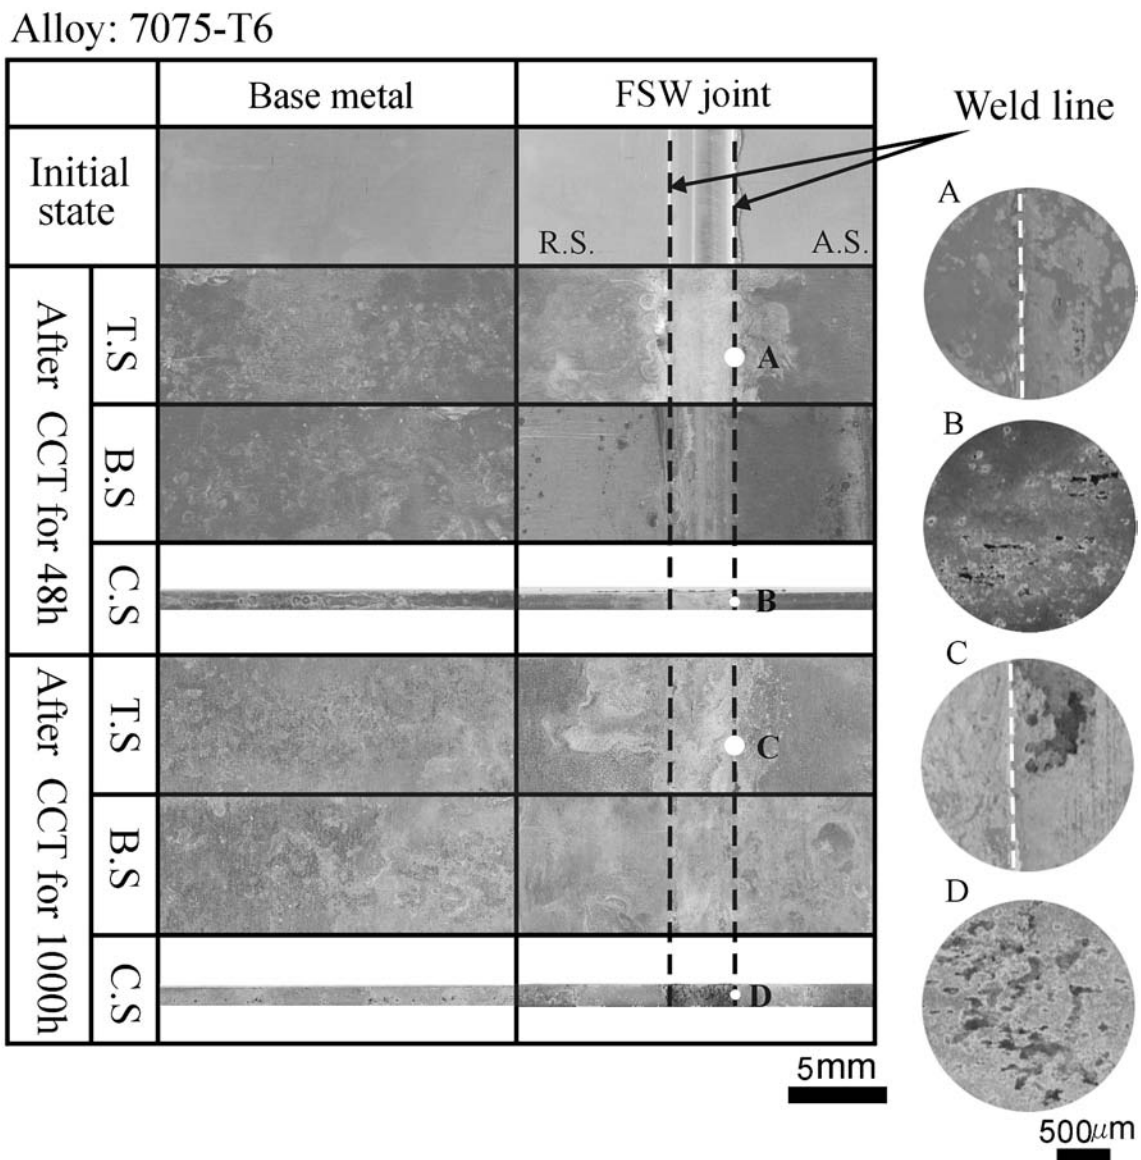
Macroscopic surface appearance of FSWed A7075-T6 samples after cyclic corrosion test for 48 and 1000 hs.
